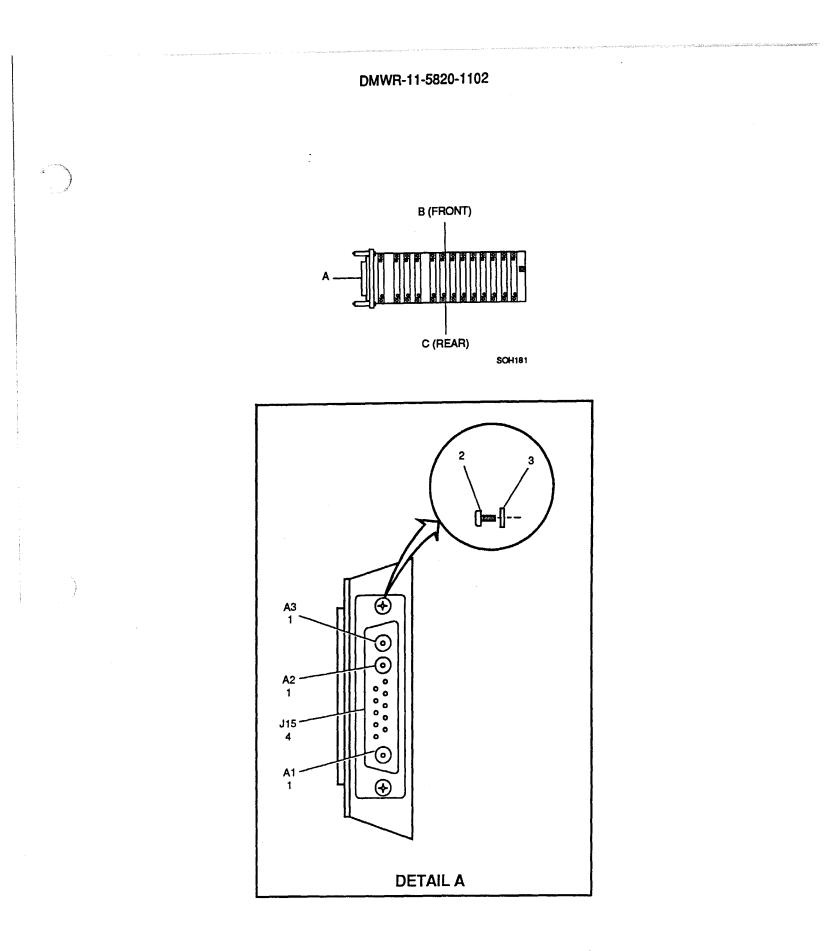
A14 Interconnect Board Assembly (Sheet 1 of 3)
